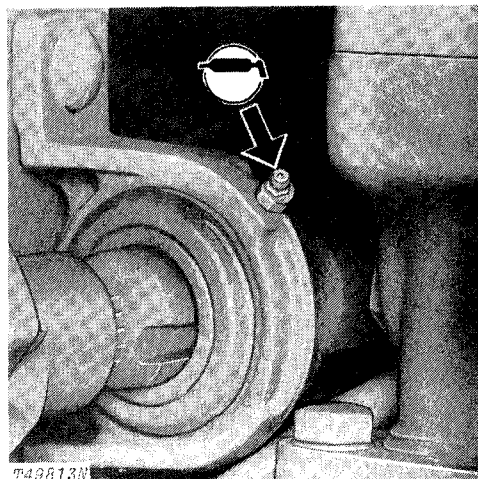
Delimiter Transmission Drive Shaft Support Bearing (1 Point)
